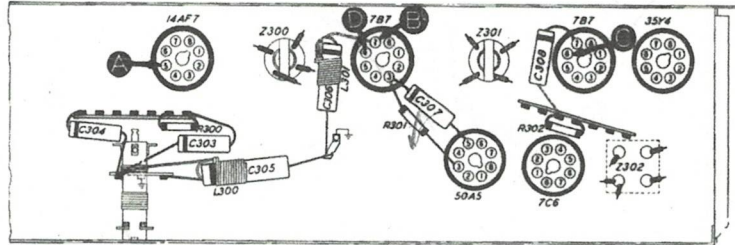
BOTTOM VIEW, SHOWING SECTION 3 TEST POINTS. TP-3372C
